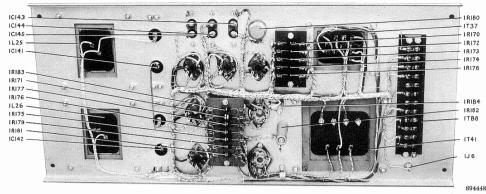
Low-Voltage Rectifier Panel, Bottom View, Parts Identified
